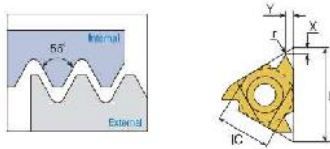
Korloy 14W IR 55° internal threading diamond insert [22]
